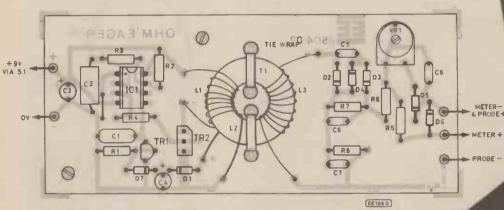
Component layout on the topside of the printed circuit board. TR2 may be a TO5 can transistor.
